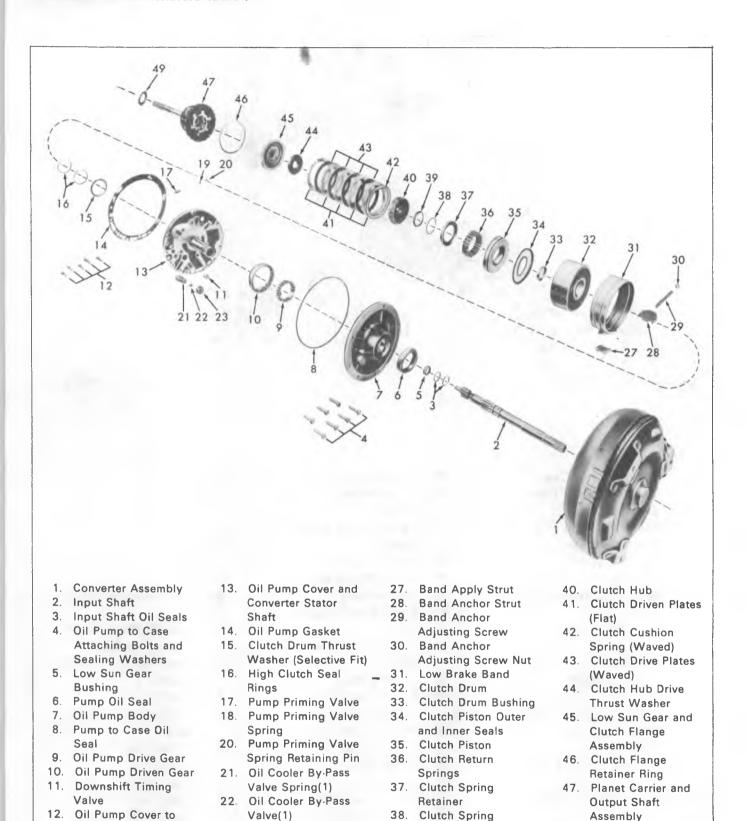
PG-Internal Mechanism-Exploded View (Typical)
